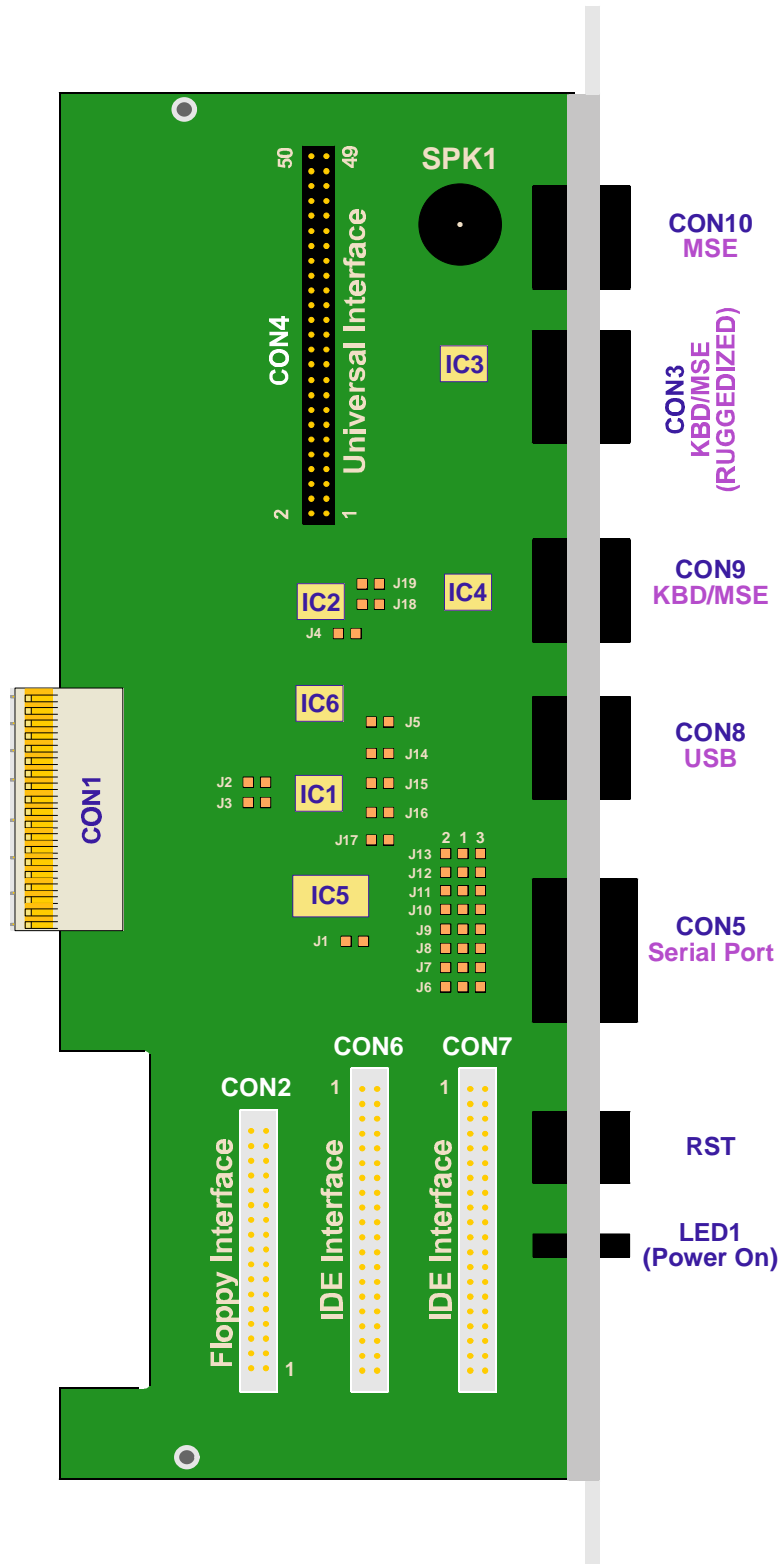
Front Panel View of CP-RIO6-10 Rear I/O Module
